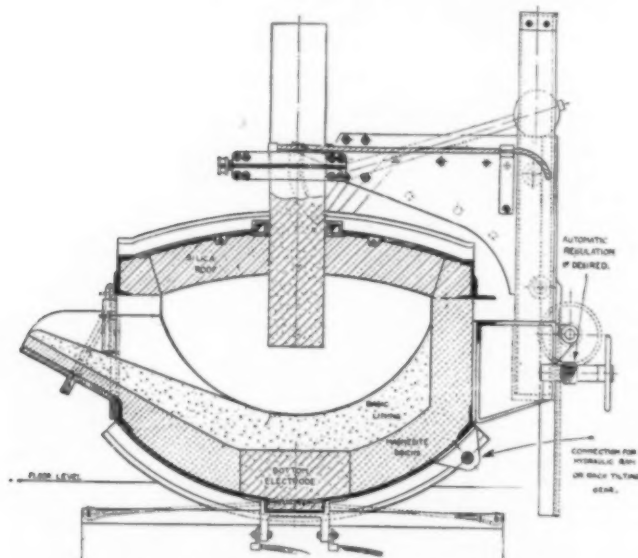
SECTION OF GRÖNWALL STEEL FURNACE.
